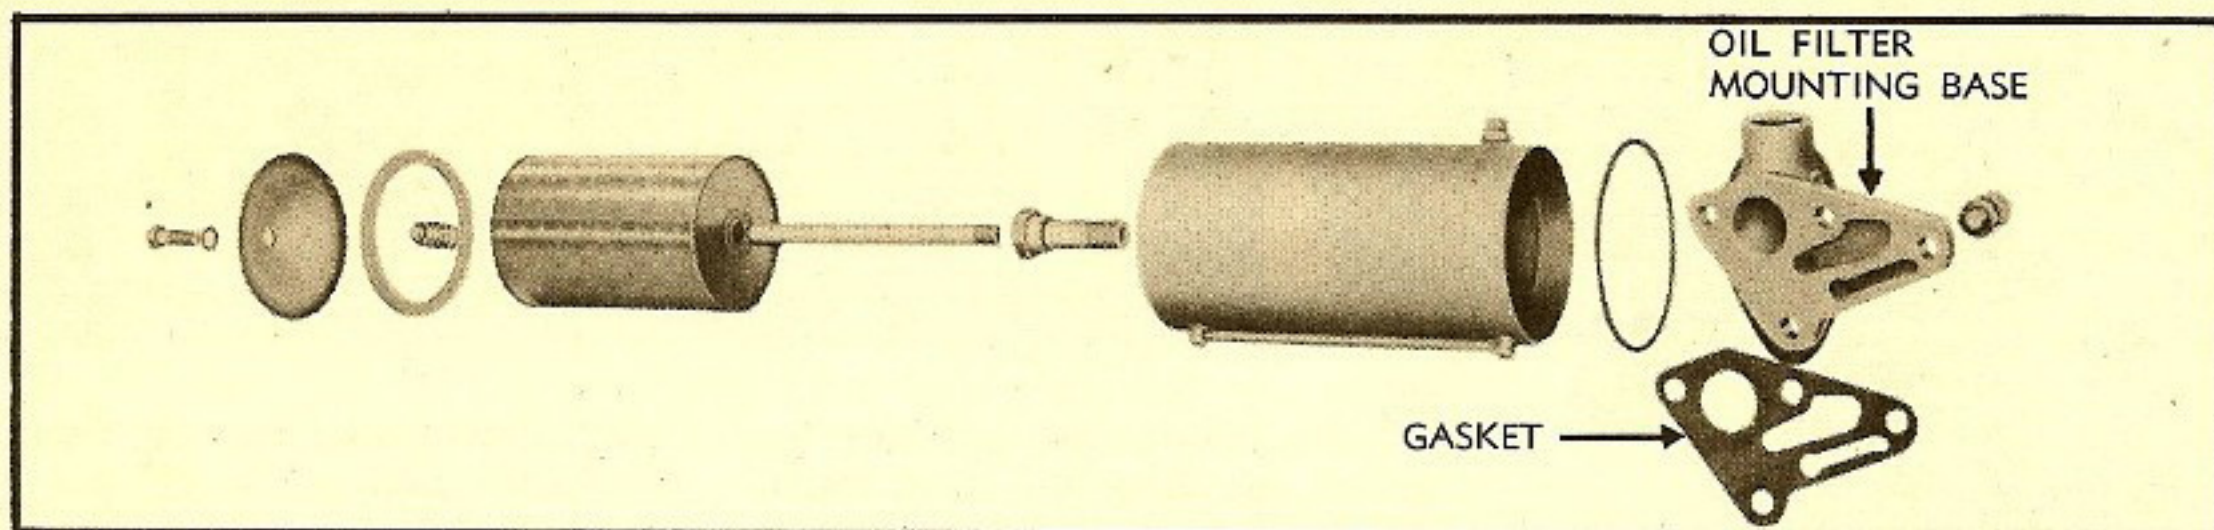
An unevenly machined oil filter mounting base will allow oil to creep into cooling system and vice versa.
